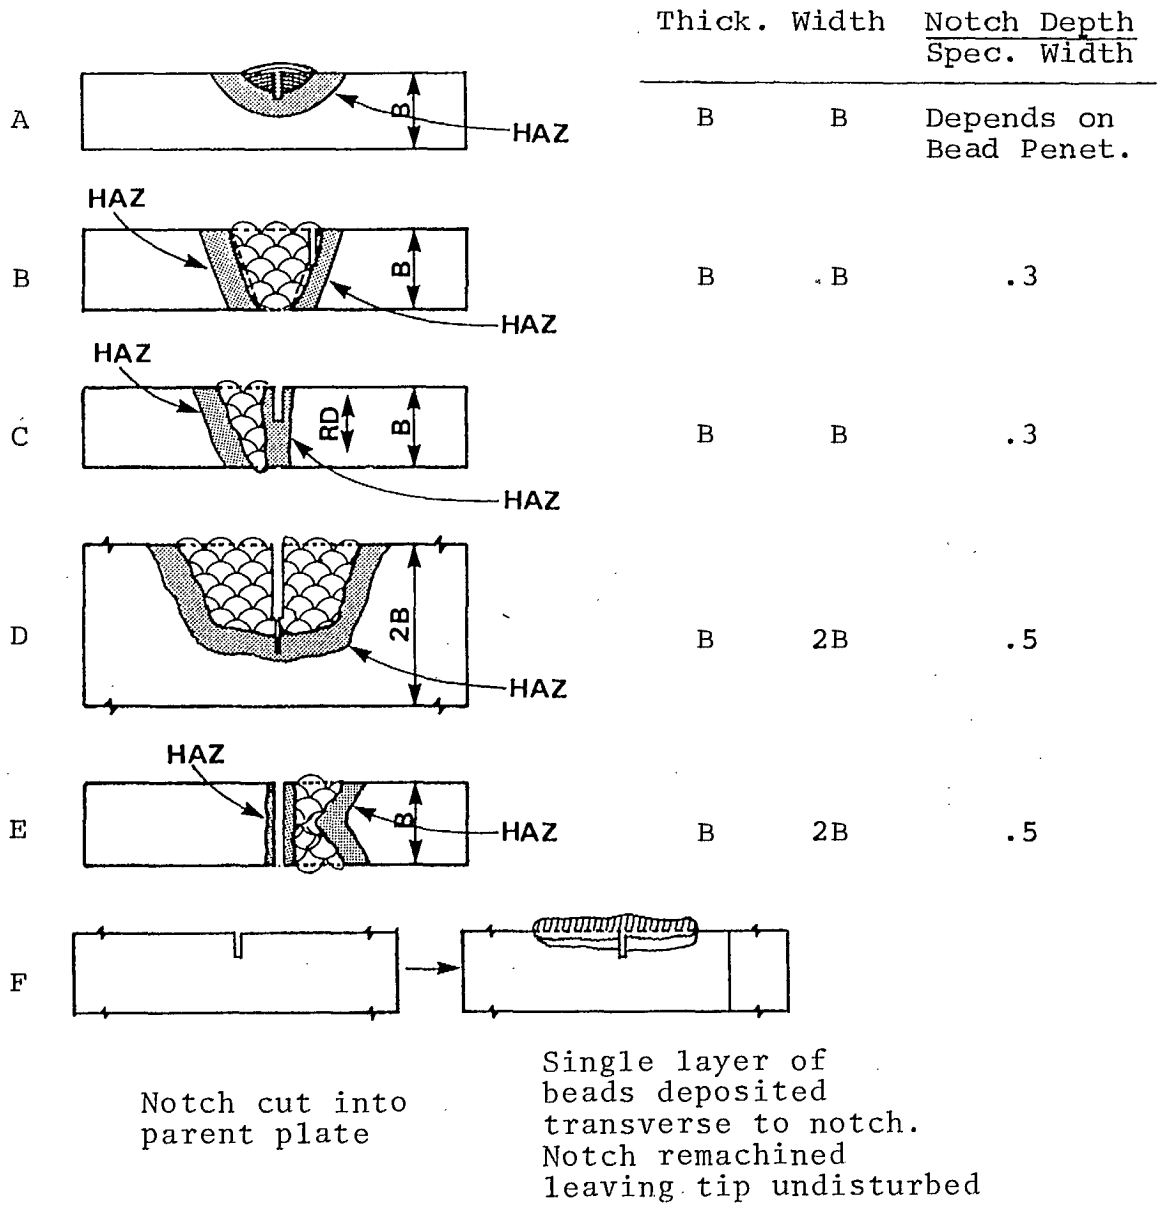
Specimen designs for assessing HAZ fracture toughness<sup>(4)</sup>
